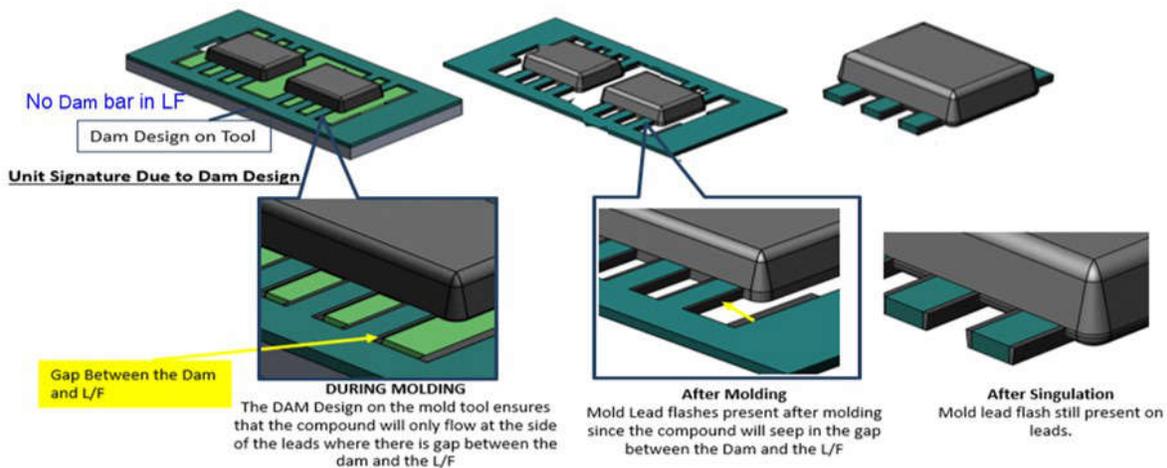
Mold Flashing on the Lead Side of SOT-5X3 Package
